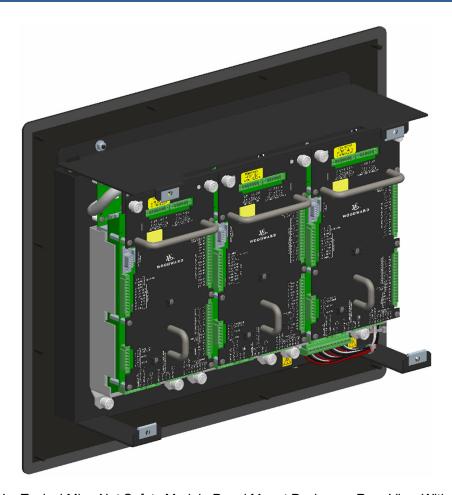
Typical MicroNet Safety Module Panel Mount Package—Rear View Without Cover
